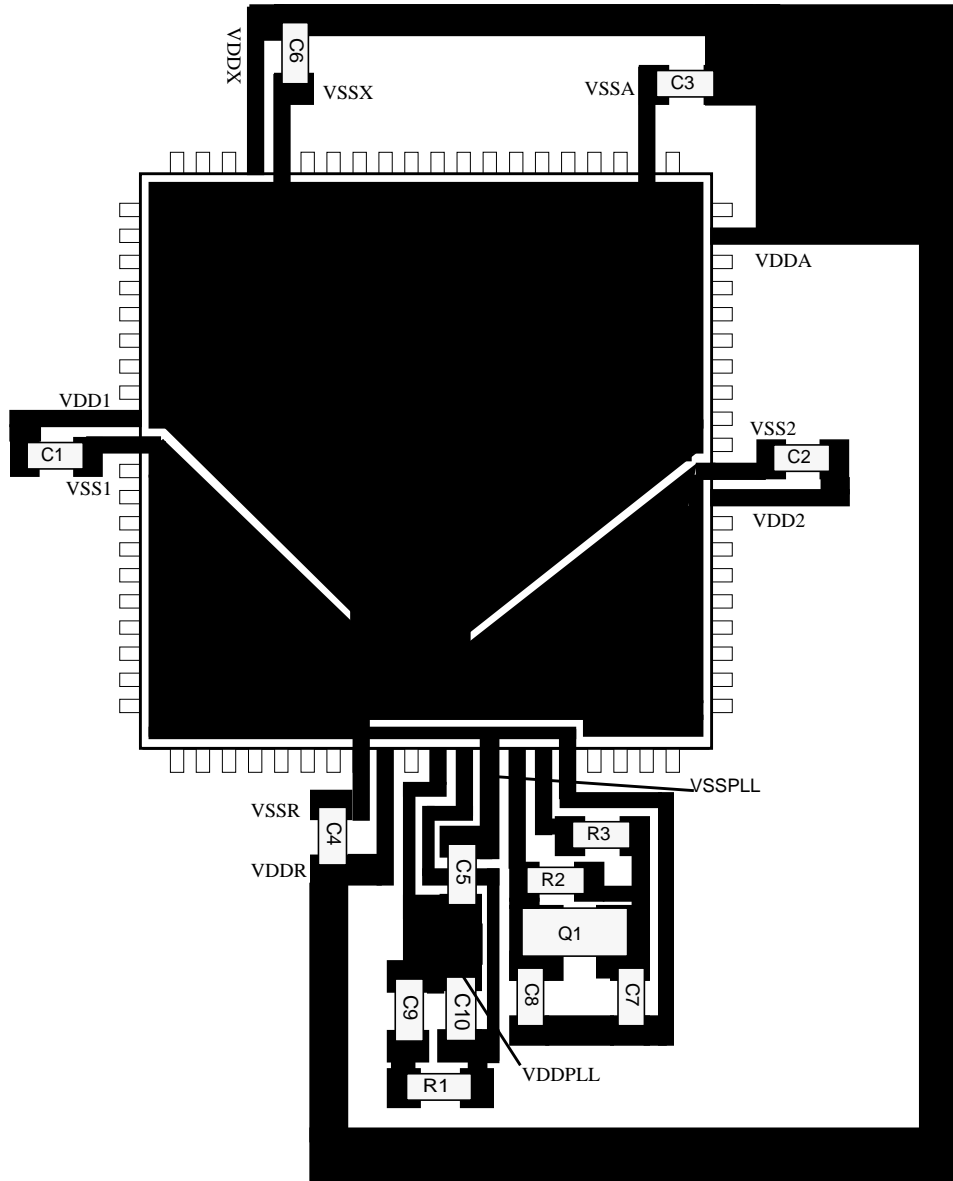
Recommended PCB Layout for 80QFP Pierce Oscillator
